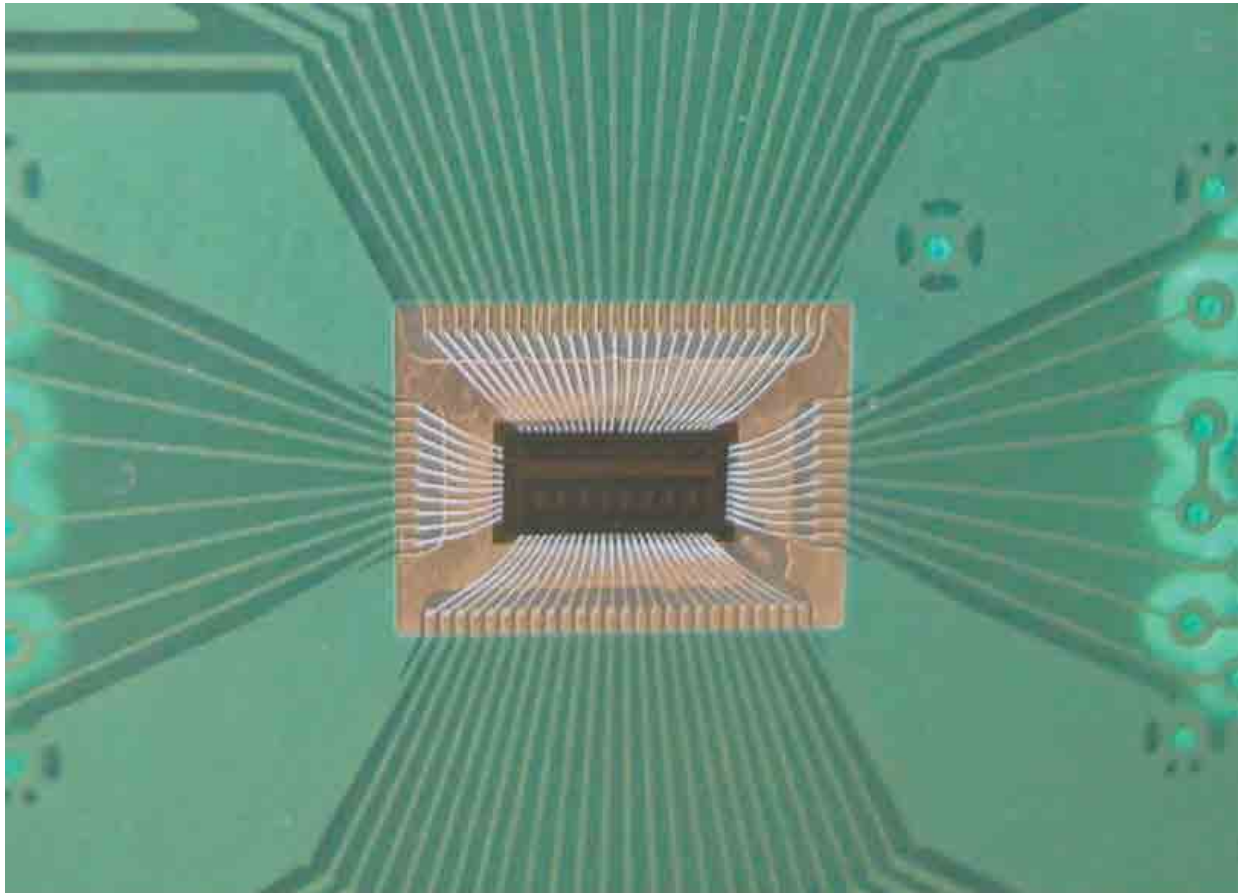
A photograph of the NINO prototype binded to PCB. Subsequently it was packaged in a plastic TAPP package and soldered onto the PCB used for the ALICE front end.
